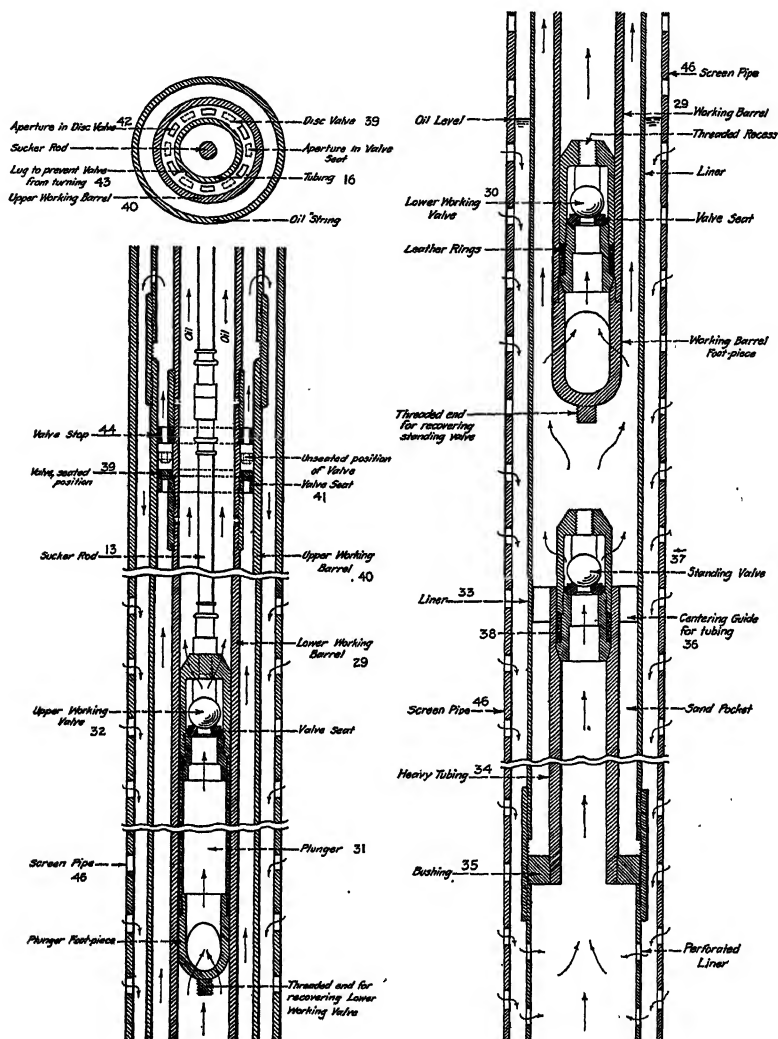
DETAIL OF UPPER END OF DOUBLE-ACTING OIL-WELL PLUNGER PUMP.
